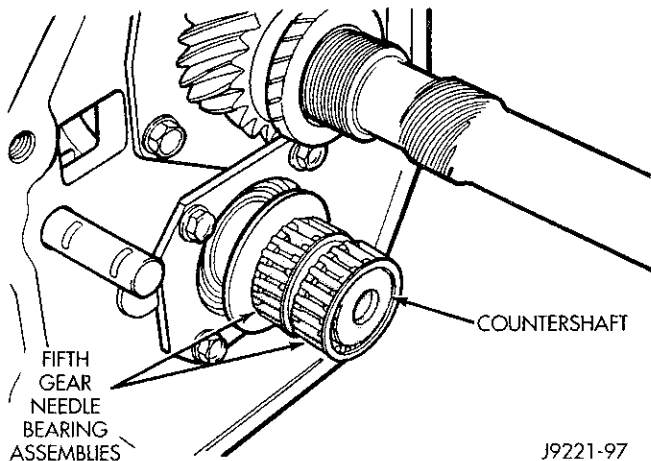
Countershaft Fifth Gear Needle Bearing Removal
